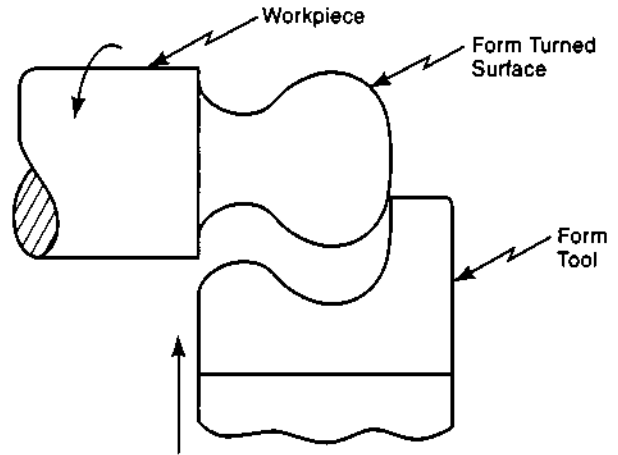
A1b Form turning - The tool is ground to the shape desired and is fed into the workpiece as it rotates, cutting a surface whose shape is the inverse of that of the form tool.
